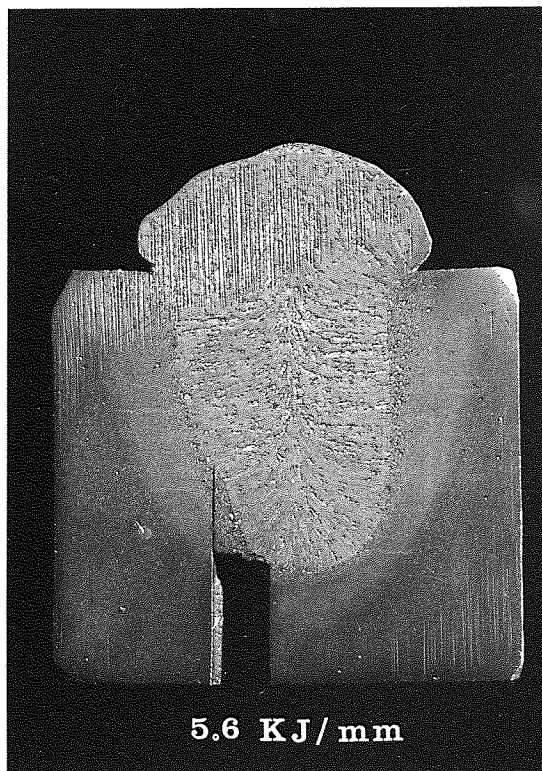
Detail of the figure 12. Note : deviation of the weld bead profile at the assembly/plate gap.
